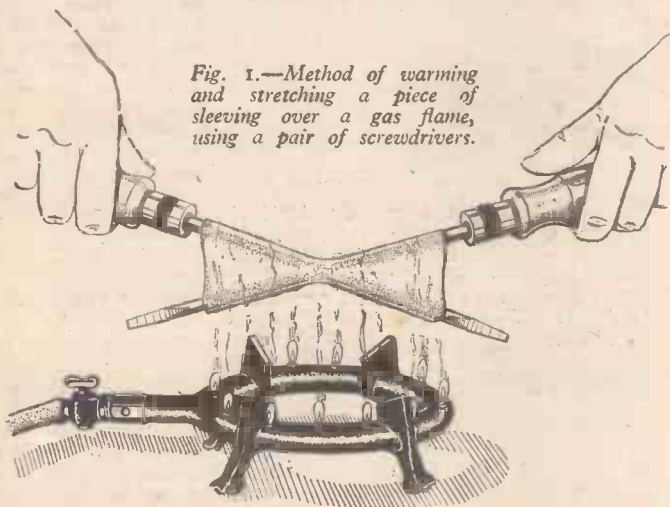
Method of warming and stretching a piece of sleeving over a gas flame, using a pair of screwdrivers.
